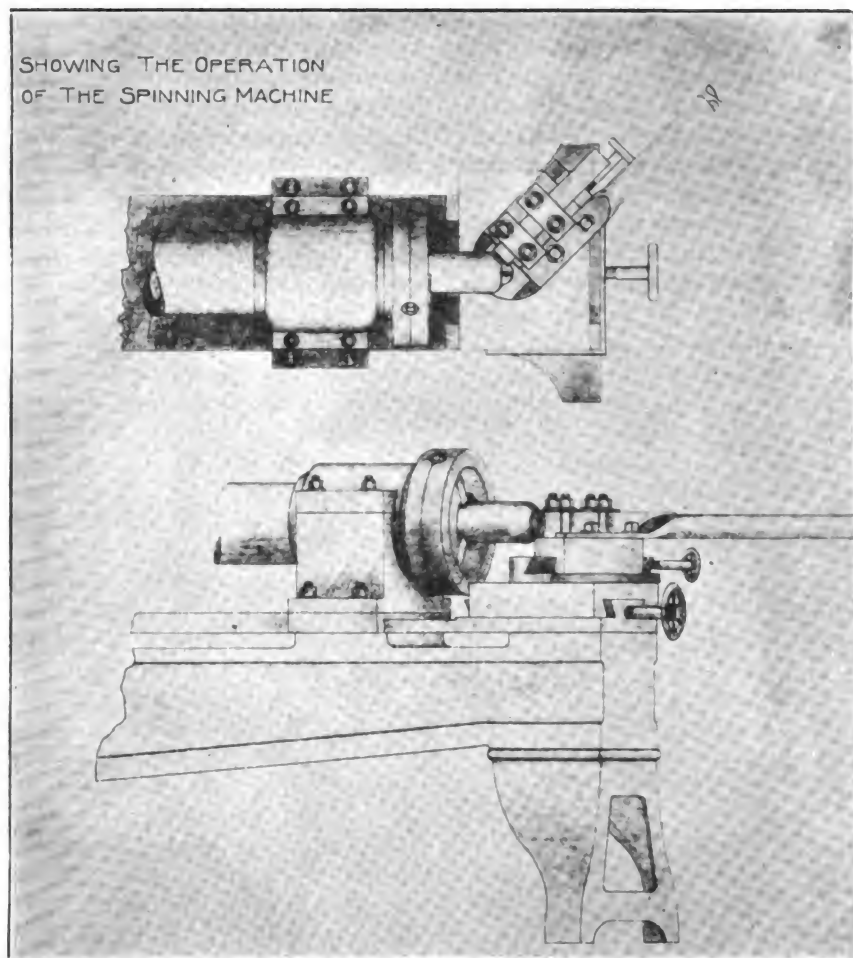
FIG. D—THE SPINNING MACHINE AND HOW IT WORKS
